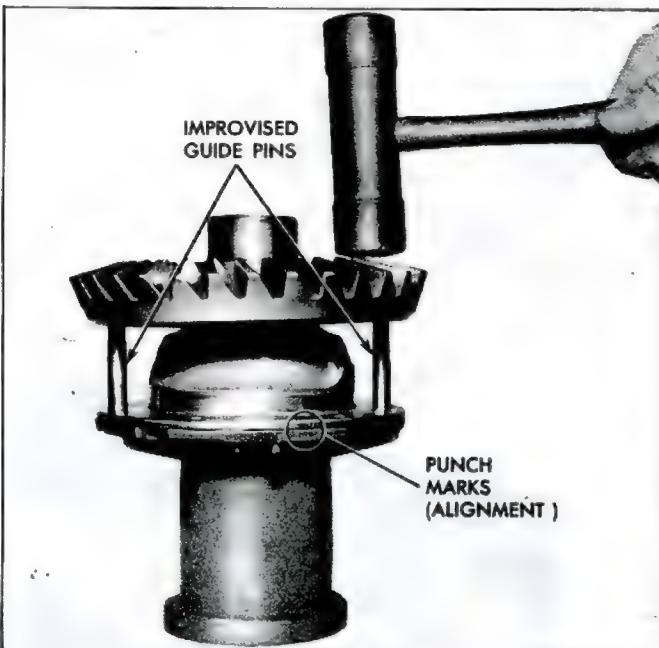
Installing Ring Gear on Differential Case and Cover Using Improvised Guide Pins
